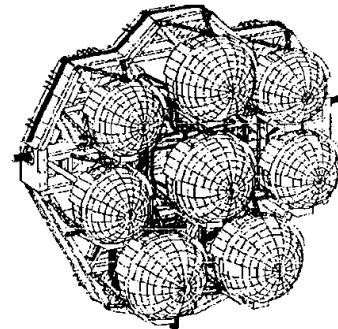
Rear view of the EDO Pallet which could be mounted in the rear of the Shuttle payload bay.⁹
